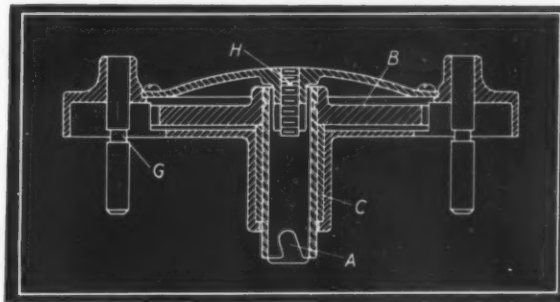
Zinc die castings are employed for gearing which drives beaters
